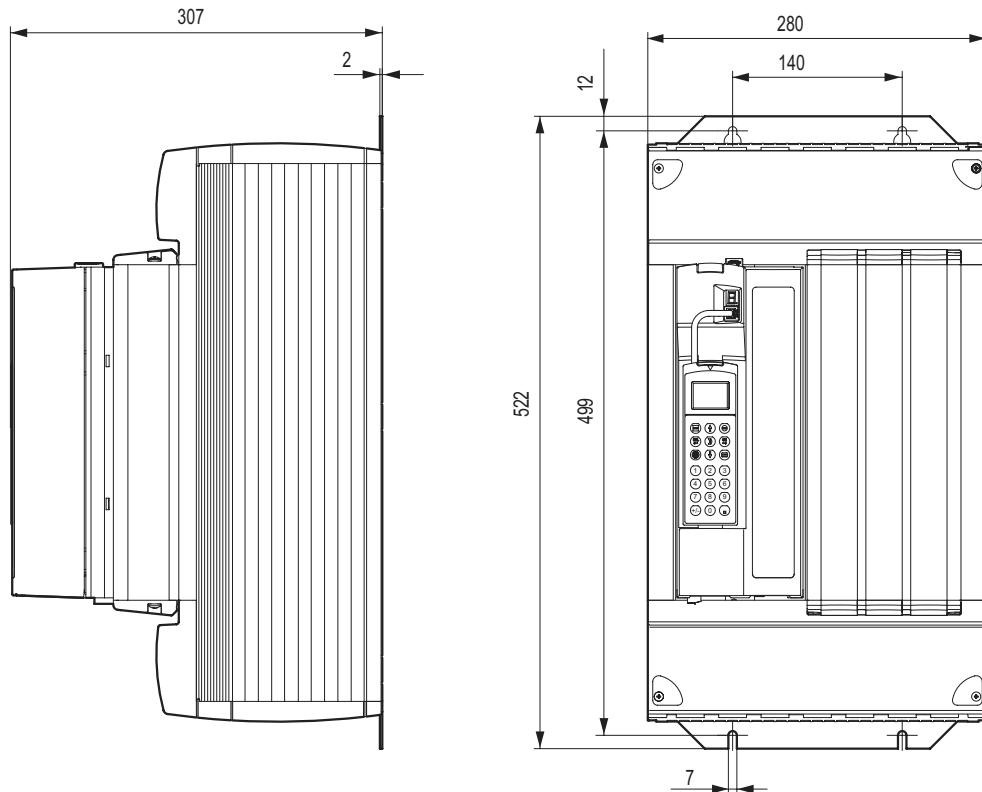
Dimension drawing for MDX61B size 3, dimensions in mm
